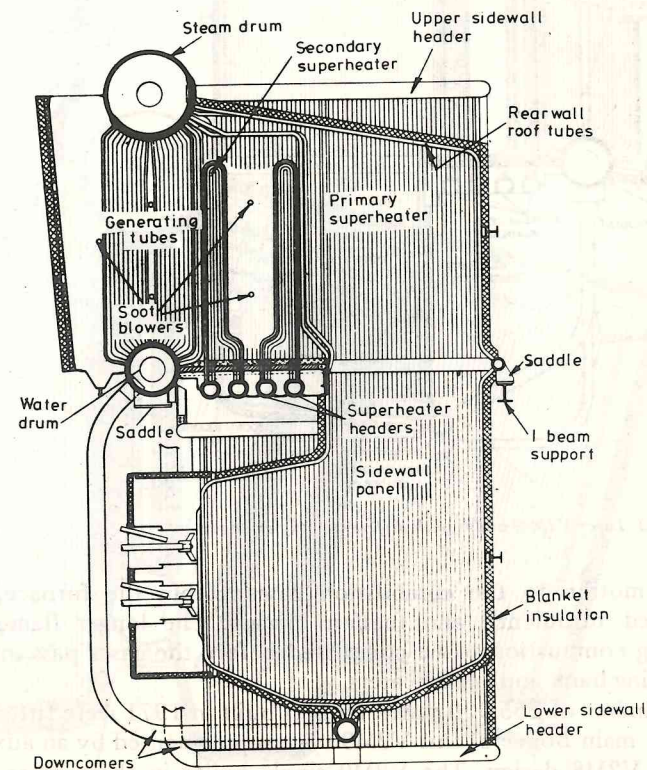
V2M-9 tangentially-fired boiler (Combustion Engineering)
